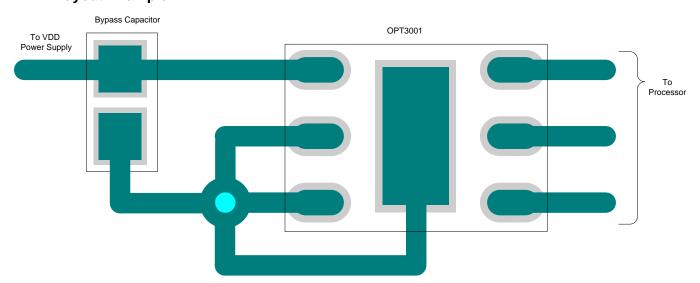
Example PCB Layout With the OPT3001-Q1 Device
